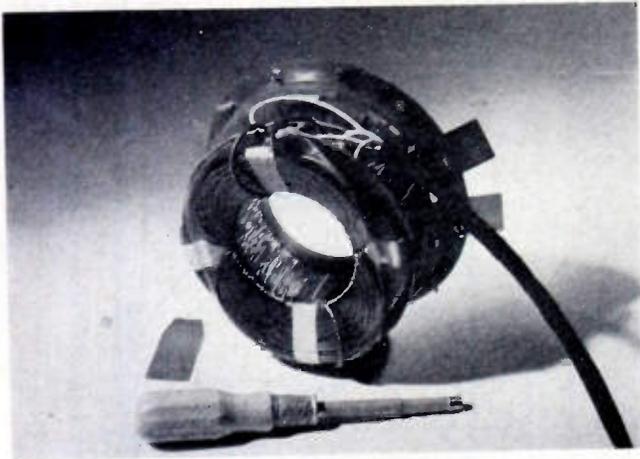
Rear view of 65° deflection yoke of Fig. 13, showing tab-clip tightening nuts and mounting of front cover fingers under core clamps.
